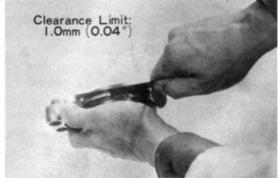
Measuring Clearance between Hub Sleeve and Shift Fork
